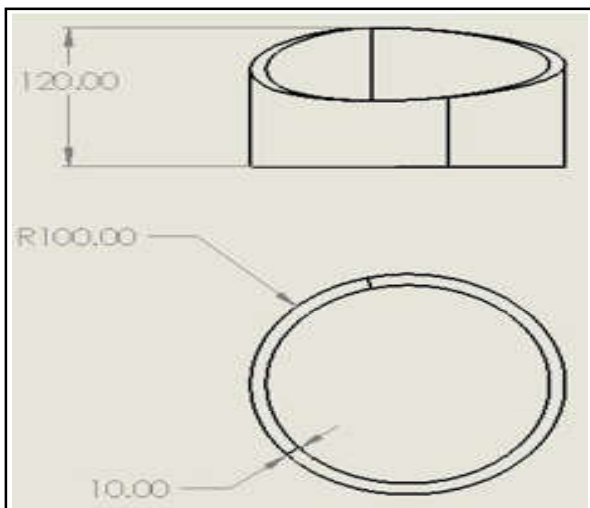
Orthographic views of Cam (All dimensions are in mm)
